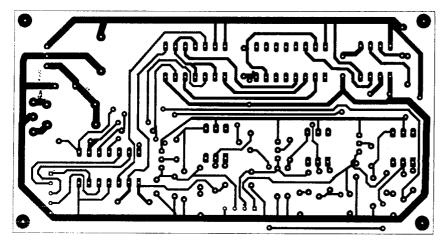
Actual-size, single-sided PCB layout for the circuit in Fig. 1
